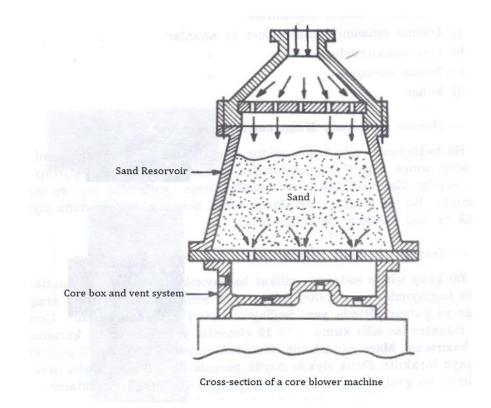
Core blower. (Courtesy Palmer Manufacturing & Supply.)
